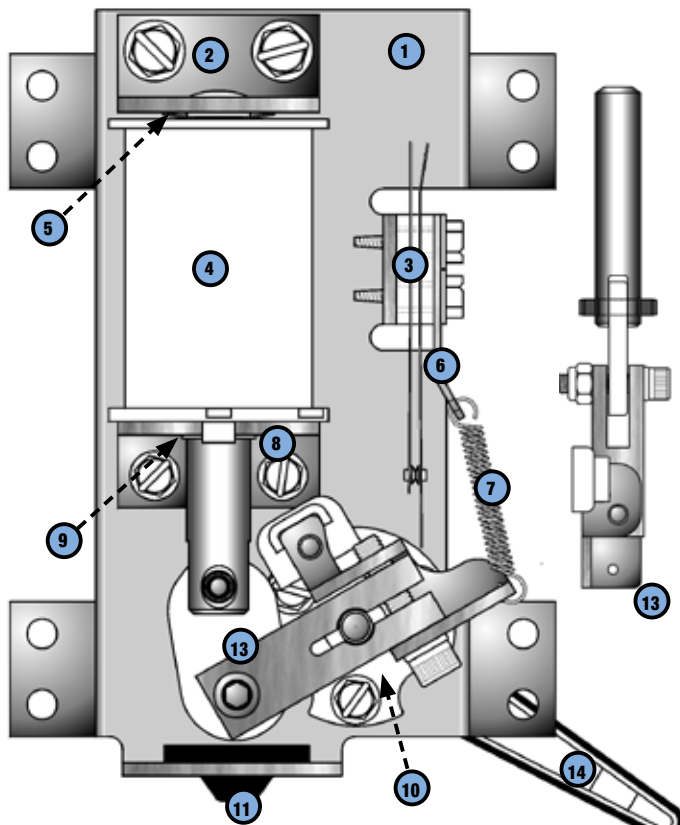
Left flipper assembly 500-6543-02-ND bottom view.
